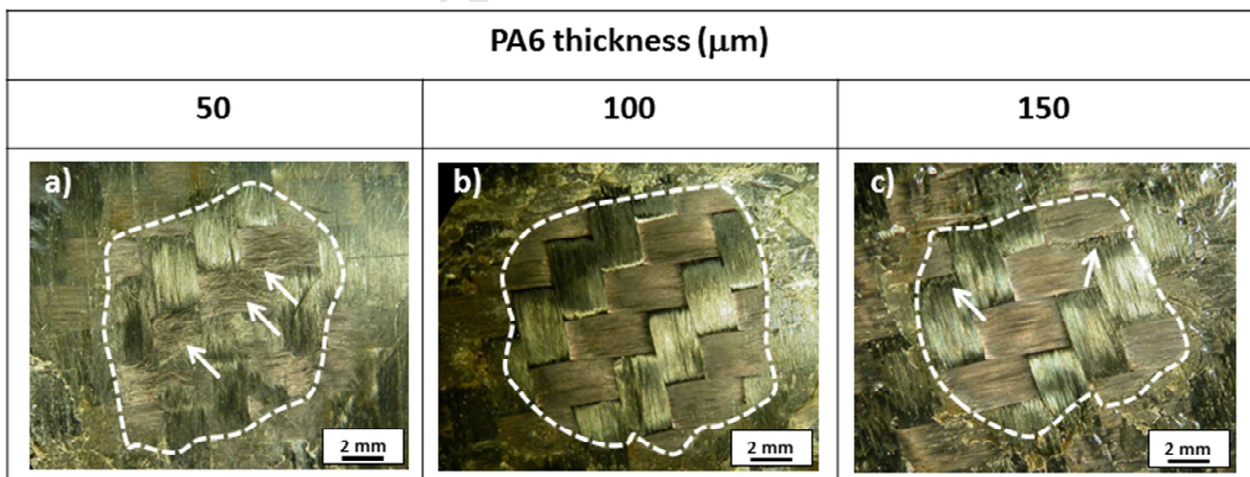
Fracture surfaces of CF-epoxy-AA5754 joints with different thickness of PA6 film.
